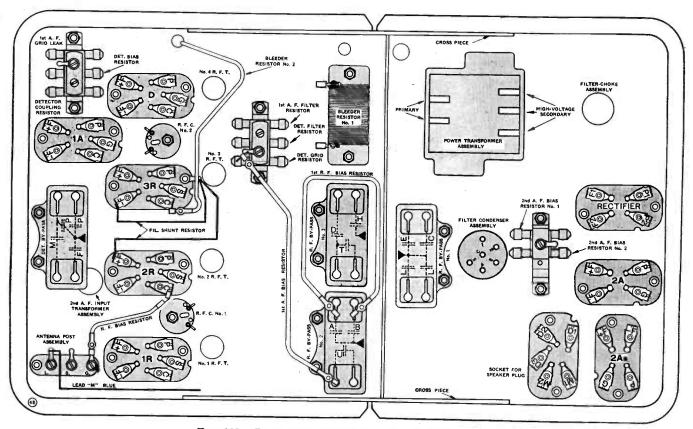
BOTTOM VIEW OF TYPE L-2 AND P CHASSIS.
